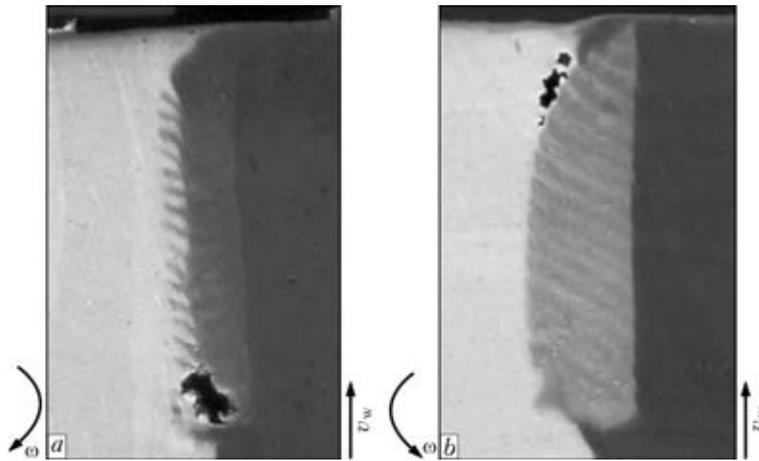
Appearance of cross-sections of welds with characteristic defects formed as a result of insufficient pressing of the shoulder to surfaces being welded at rotation of a tool with tips of a cylindrical shape having cuts in the form of metric thread in the clockwise (*a*) and counterclockwise (*b*) direction
